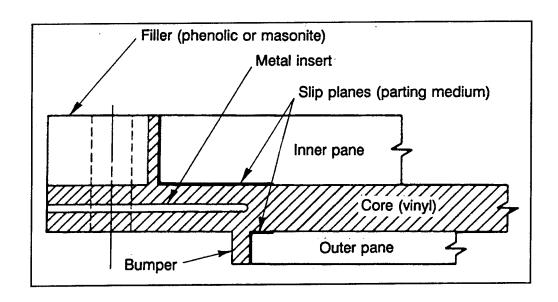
W/WS Construction Showing Location of Slip Planes
